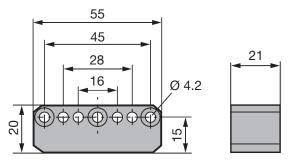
Installation dimensions of BTL5-P-5500-2 magnet
